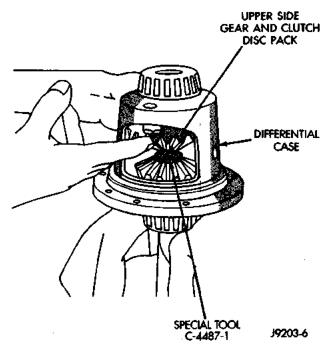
Upper Side Gear & Clutch Disc Pack Installation—Shown With 6963-A Holder
